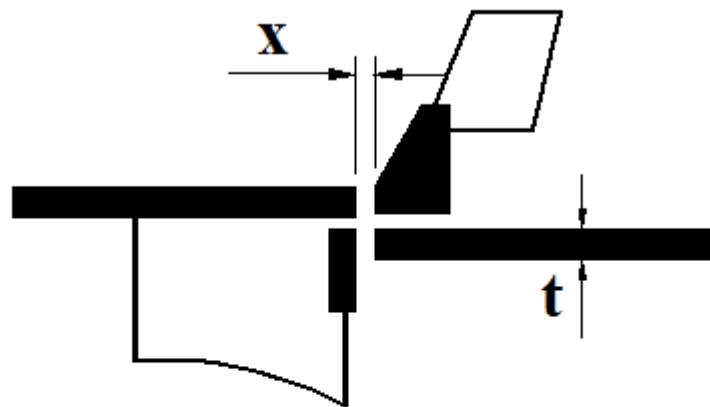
A SERIES Gear Motorized Guillotine Shear Cutting Space Adjustment
